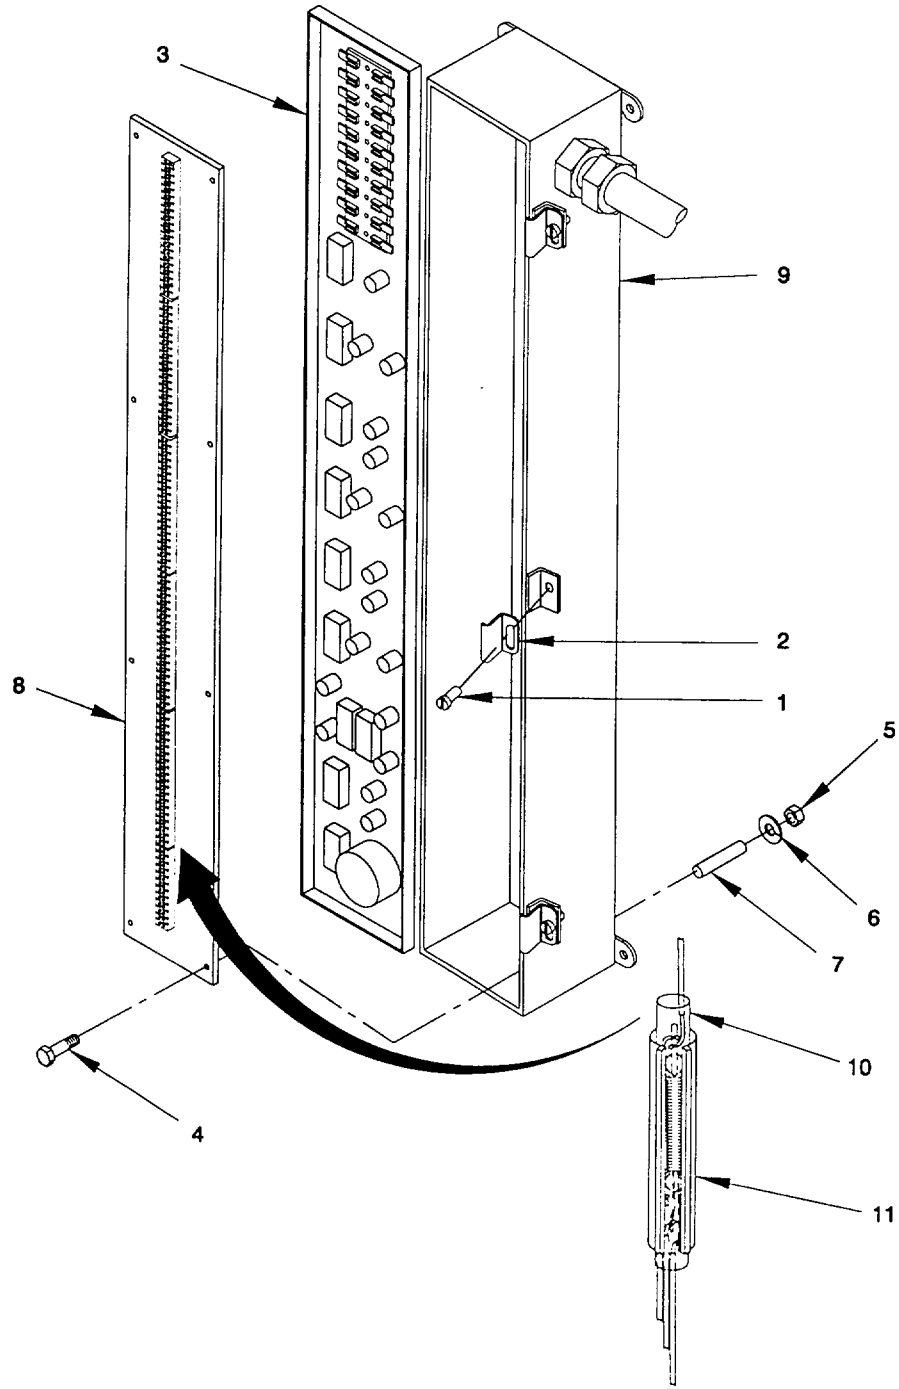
Reed Switch Assembly, Mast Enclosure, Remove/install.
